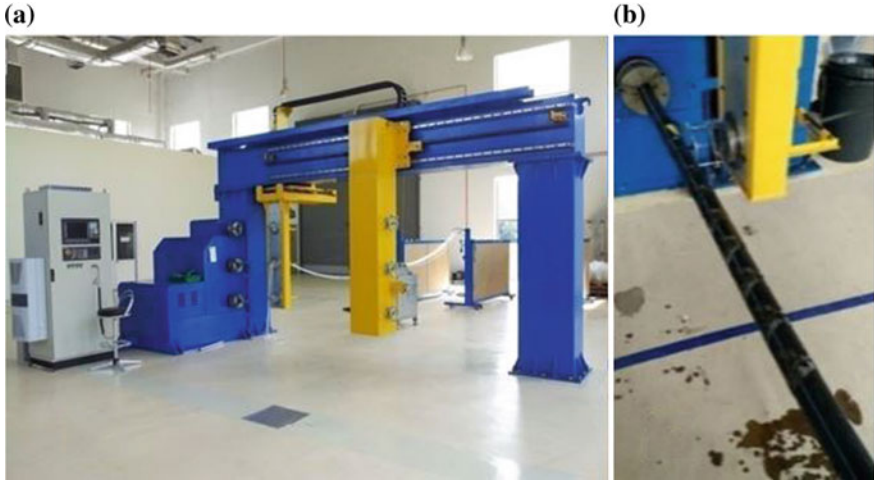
a Filament winding machine. b Partial wrapping of specimen
